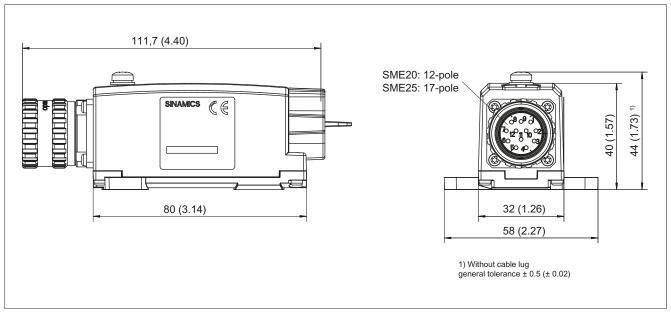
Dimension drawing of Sensor Module External SME25, all data in mm and (inches), order number 6SL3055-0AA00-5HA3
